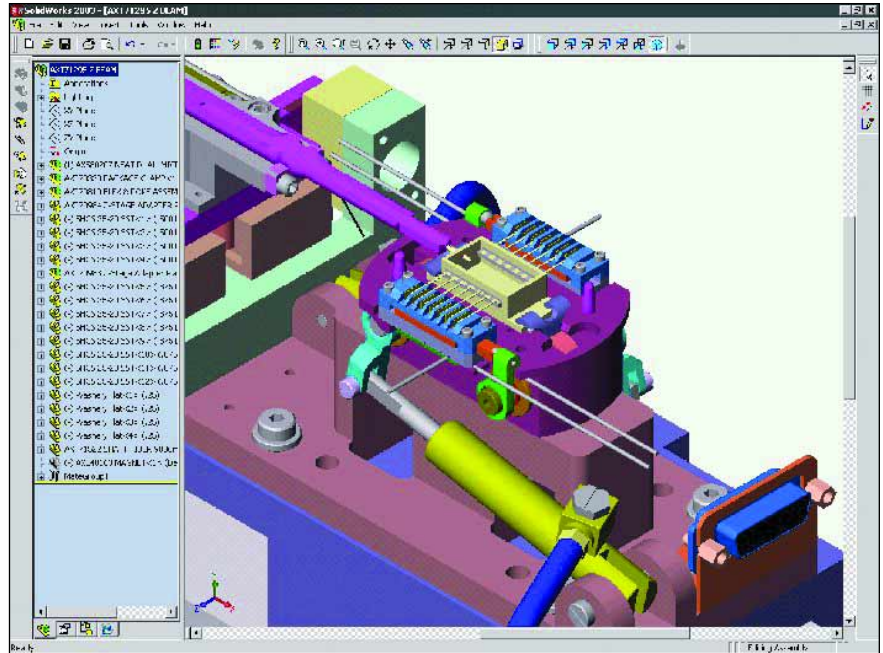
This Automated Packaging Cell was designed with SolidWorks software, which enables engineers to design the MEMS device, output the photo mask, design the packaging, and put it together in a single software package.
